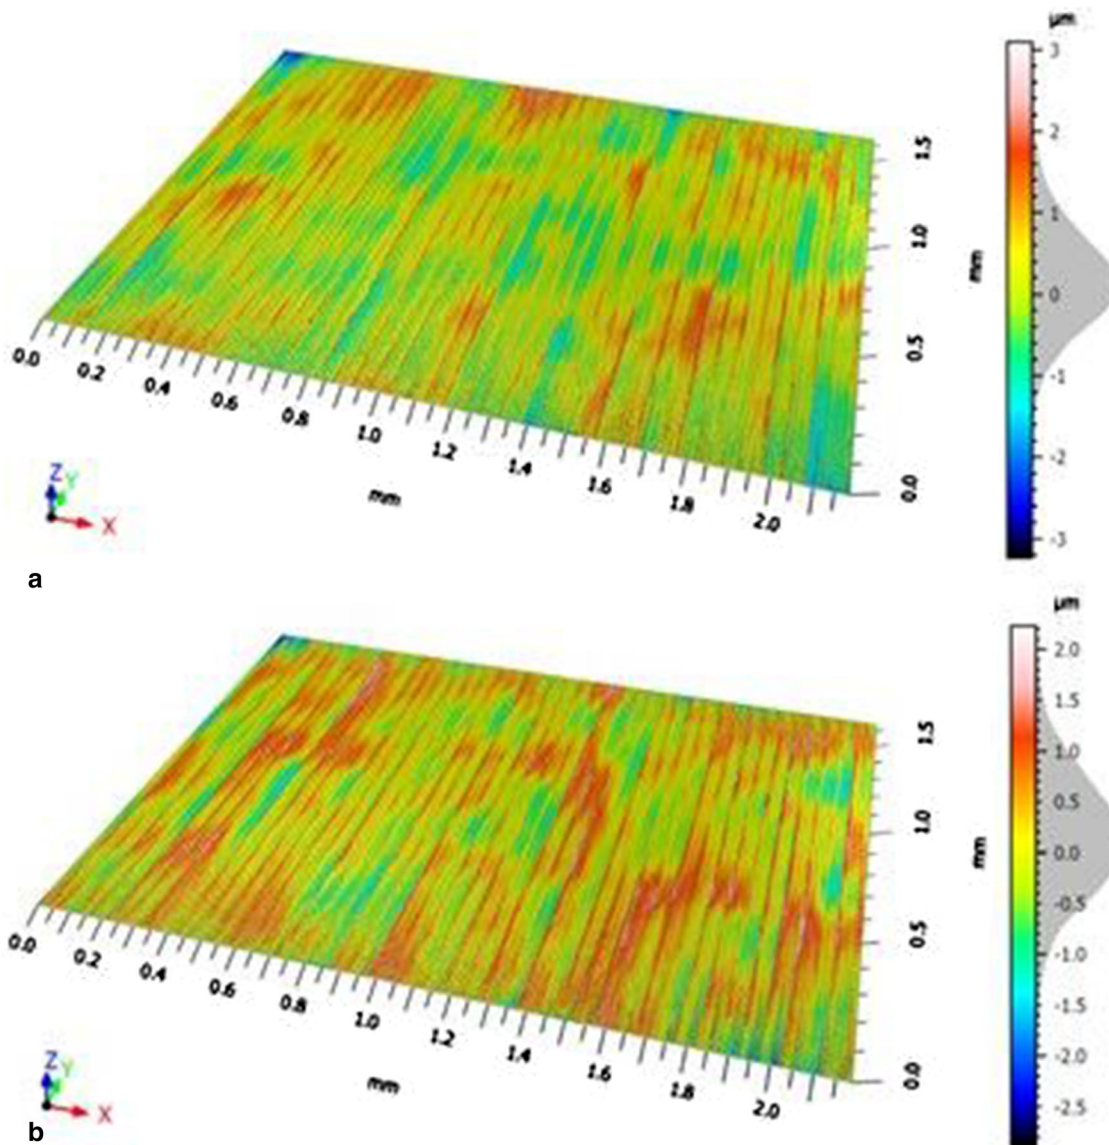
3D view of postmachined surfaces manufactured with a) 30  $\mu\text{m}$  and b) 50  $\mu\text{m}$  layer thickness
